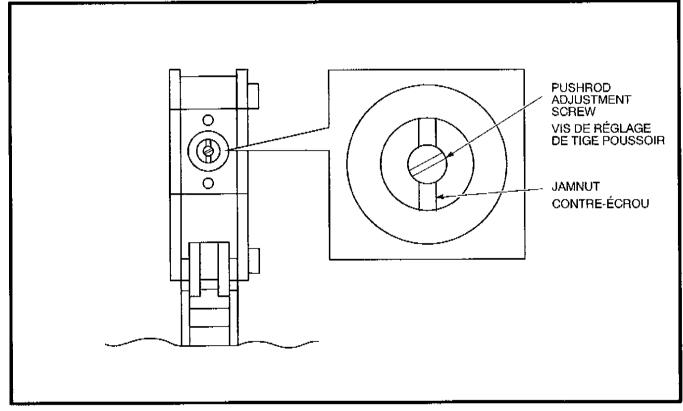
Adjustment of Safety Cable Indenter (Same for Hand and Pneumatic Tool Models)
